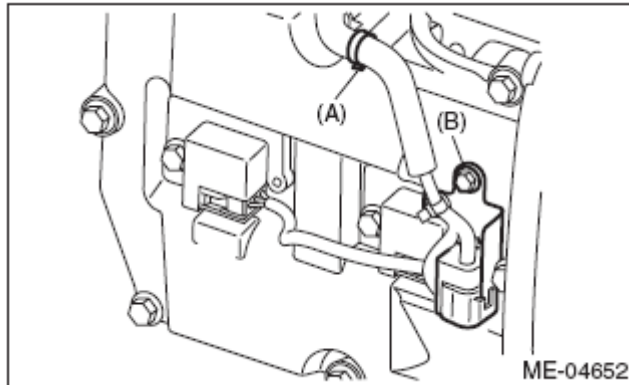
Identifying Rocker Cover Stay And Engine Harness Clip
